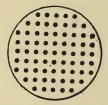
Draw-plate for Kneading Carbon Mixture.
